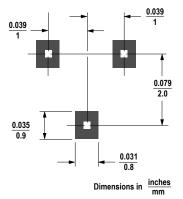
Recommended PCB Pad Layout for Avago's SOT-23 Products.
